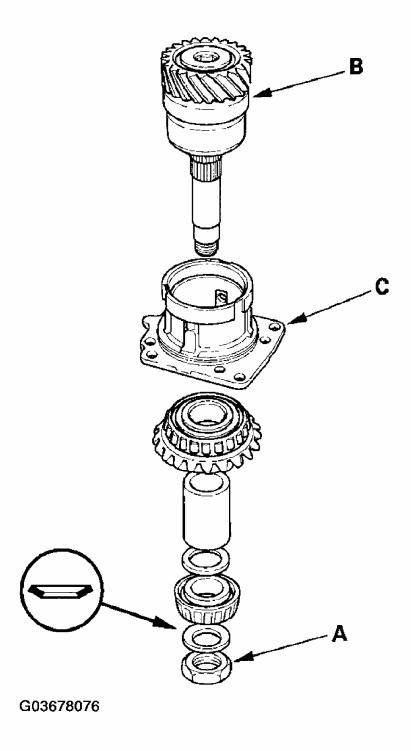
Removing Locknut And Transfer Shaft Assembly From Transfer Holder Courtesy of AMERICAN HONDA MOTOR CO., INC.
